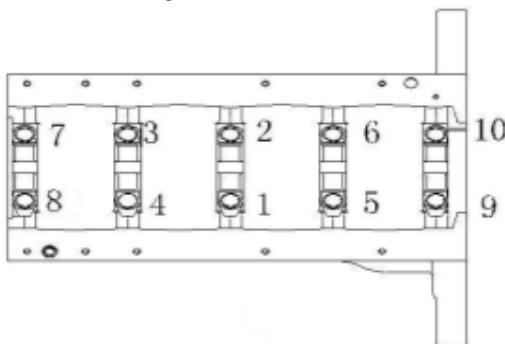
Sequence of tightening bolt of the main shaft bearings
